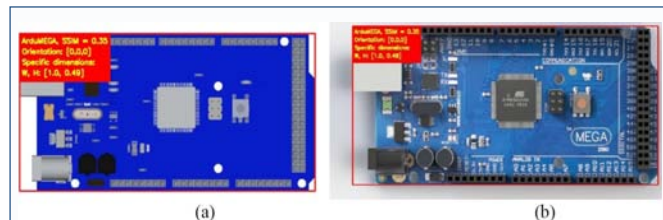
OD on Arduino-MEGA PCB board, (a) CAD detection, (b) CAD-update.
